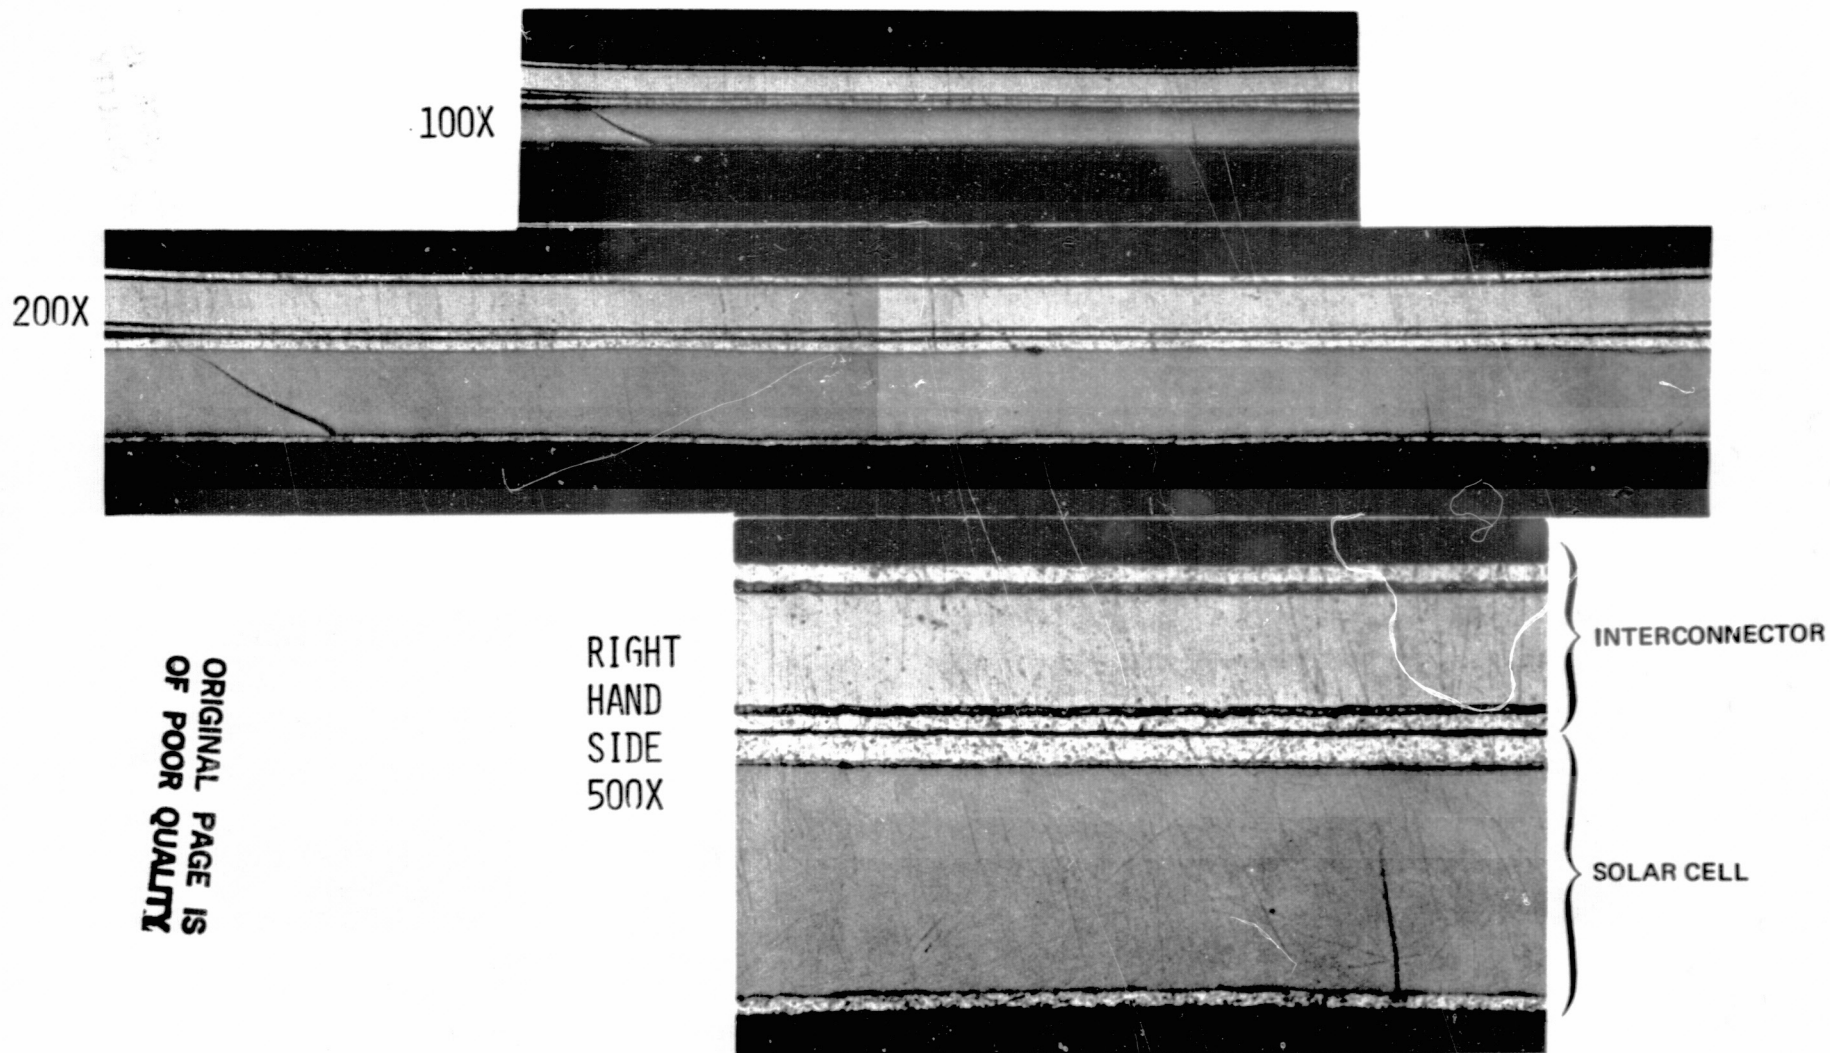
Joint No. 45, Cross Section of Cell Front Contact Weld
